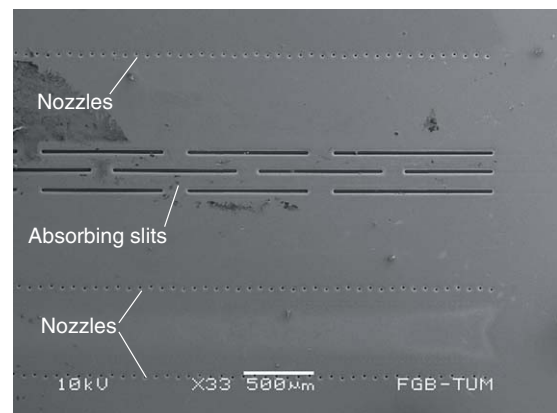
Section of a nozzle plate. (Source: Lehrstuhl für Mikrotechnik und Medizingerätetechnik, Institut für Mechatronik, Technische Universität Munich.)
